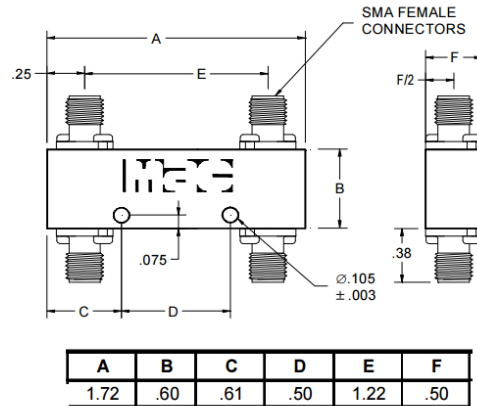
MAC Technology C7256D Hybrid Outline Drawing
